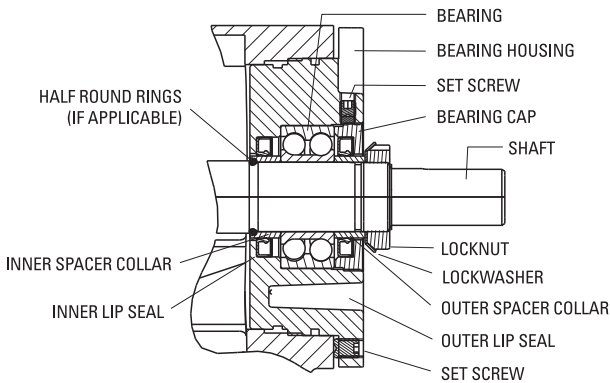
THROUGH G1-82 BEARING HOUSING ASSEMBLY
